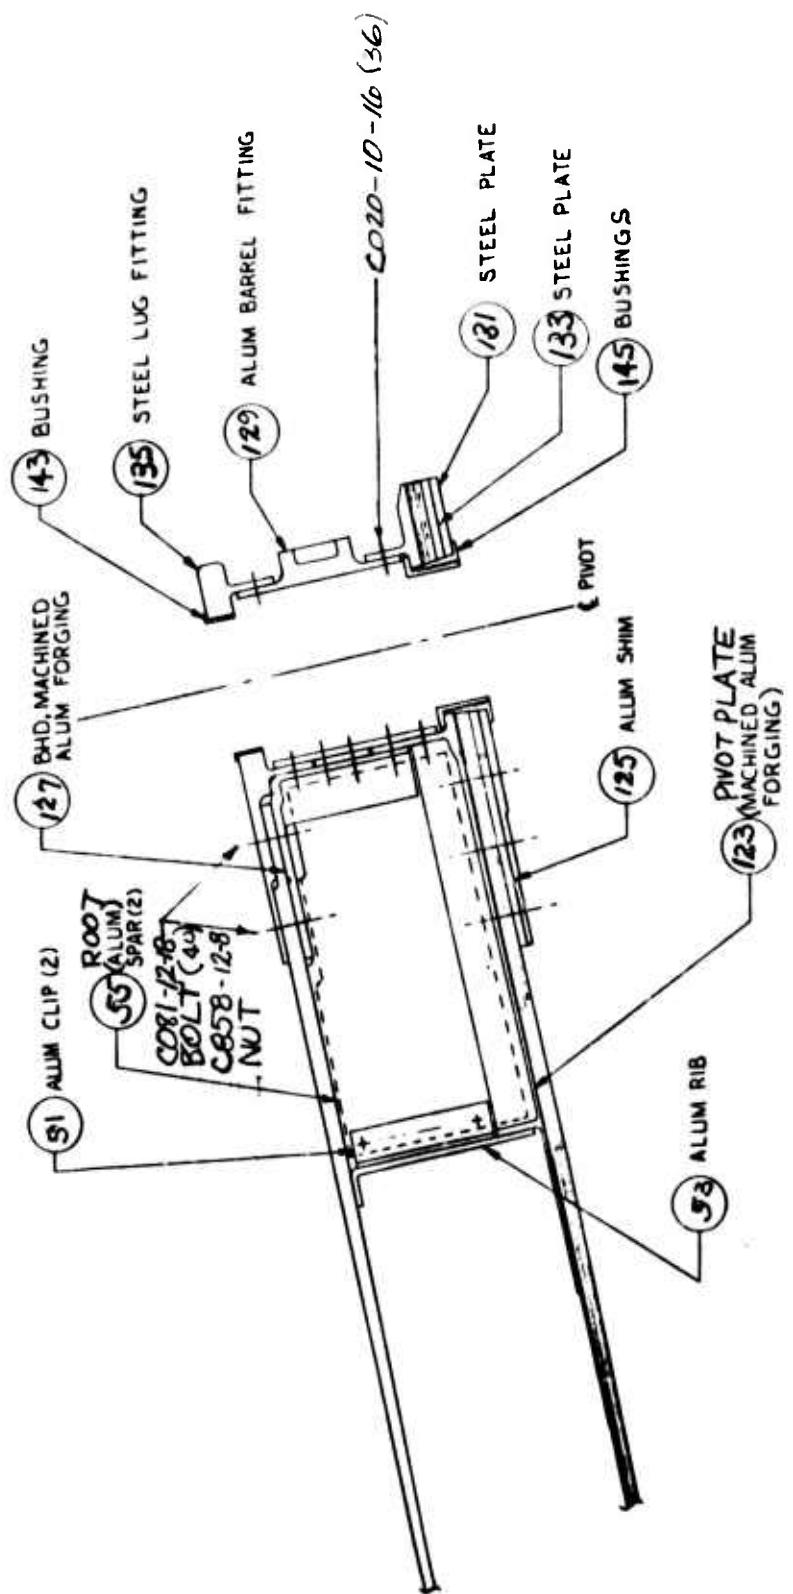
633RW001 Pivot Fitting (Sheet 2 of 2)
